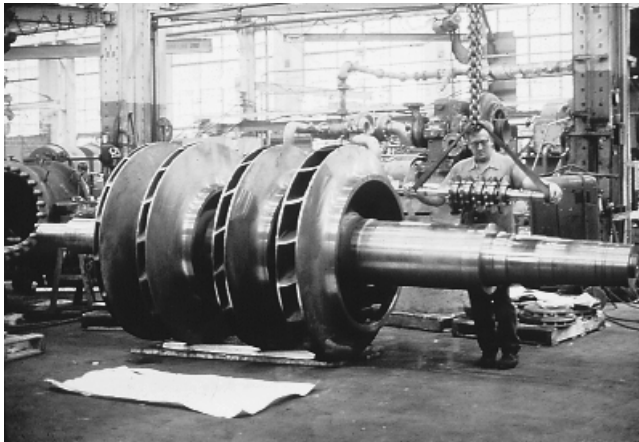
Range of impeller sizes typically available. (*Dresser-Rand Company, Olean, N.Y.*)
